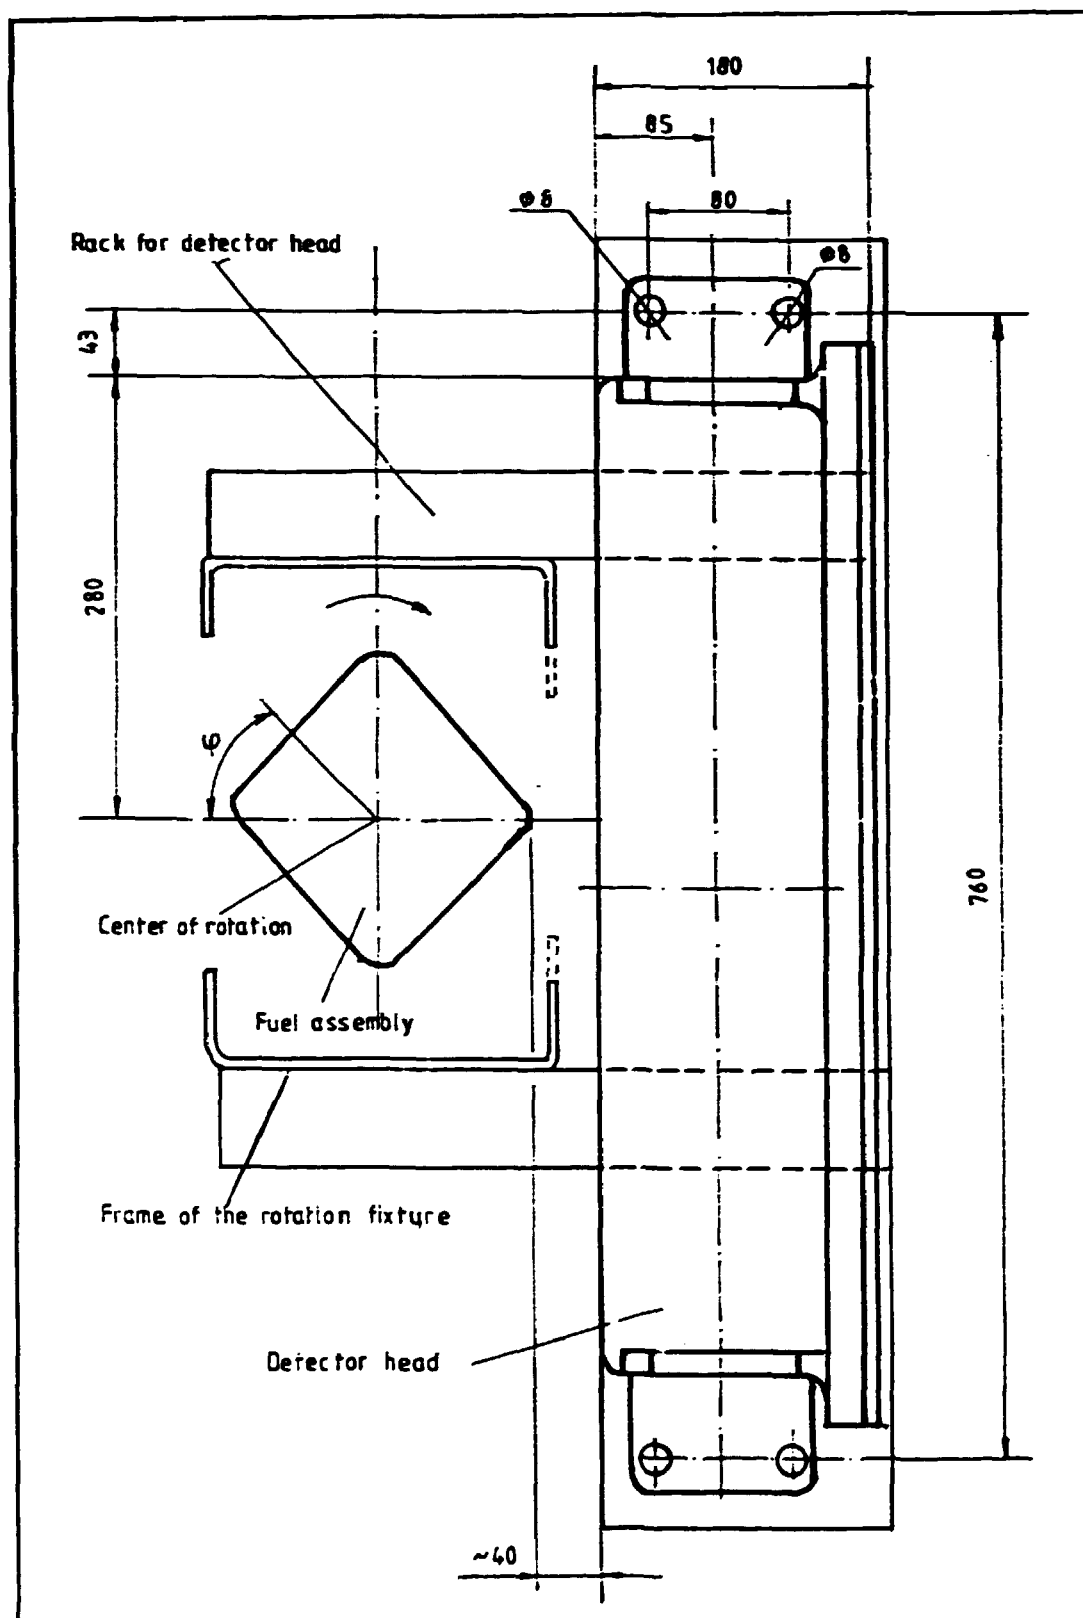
Geometry of the tomographic measurements at the TVO KPA-STORE.
